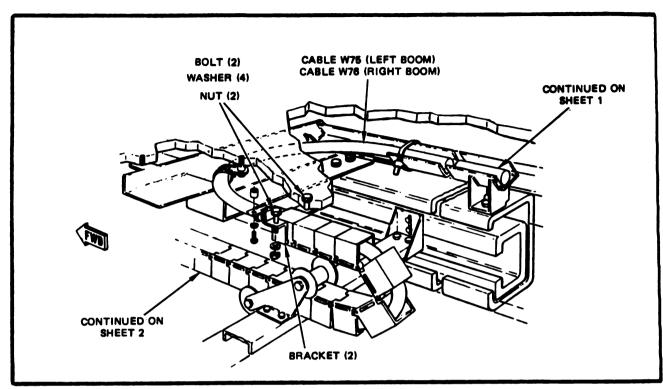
Cage Interconnecting Cable Assemblies (Sheet 2 of 5)
